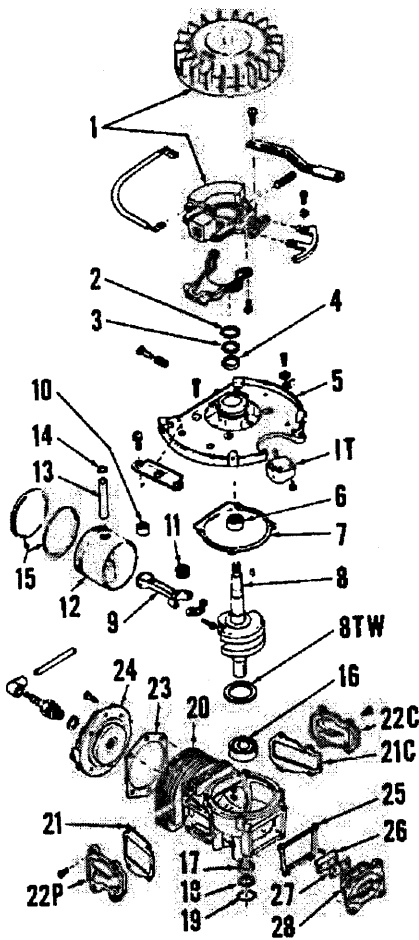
Exploded view of typical AV817 engine. All models are equipped with a solid state magneto.
